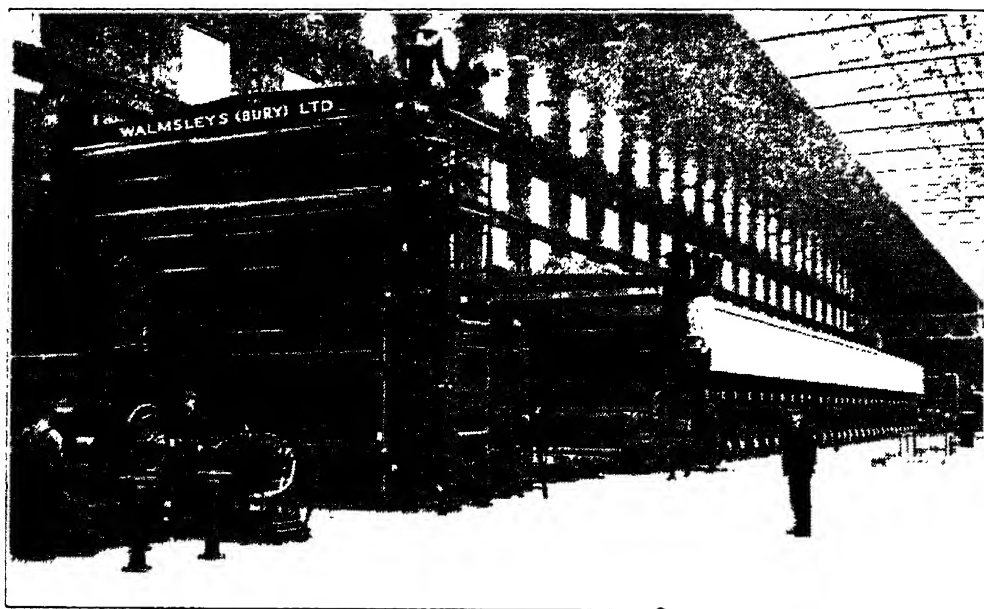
VIEW OF THE DRY END OF A FOURDRINIER MACHINE EQUIPPED WITH A MINTON VACUUM DRYER
